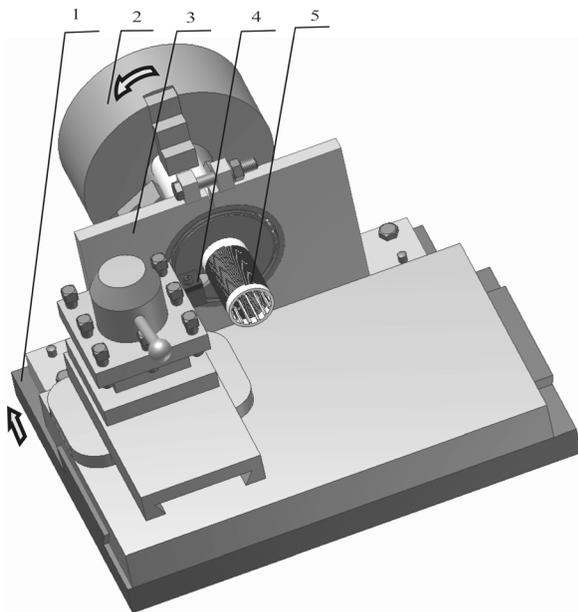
Slotting of pipe having internal grooves on lathe: 1—carriage, 2—chuck, 3—follow rest with ball bearing and reducing bushing, 4—DC tool, and 5—workpiece
